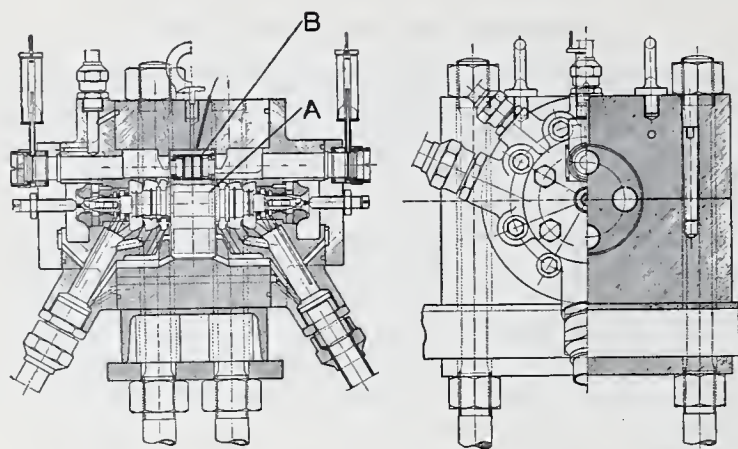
CROSS-SECTIONAL VIEW OF OIL-TURBINE ULTRACENTRIFUGE. A, rotor; B, cell
